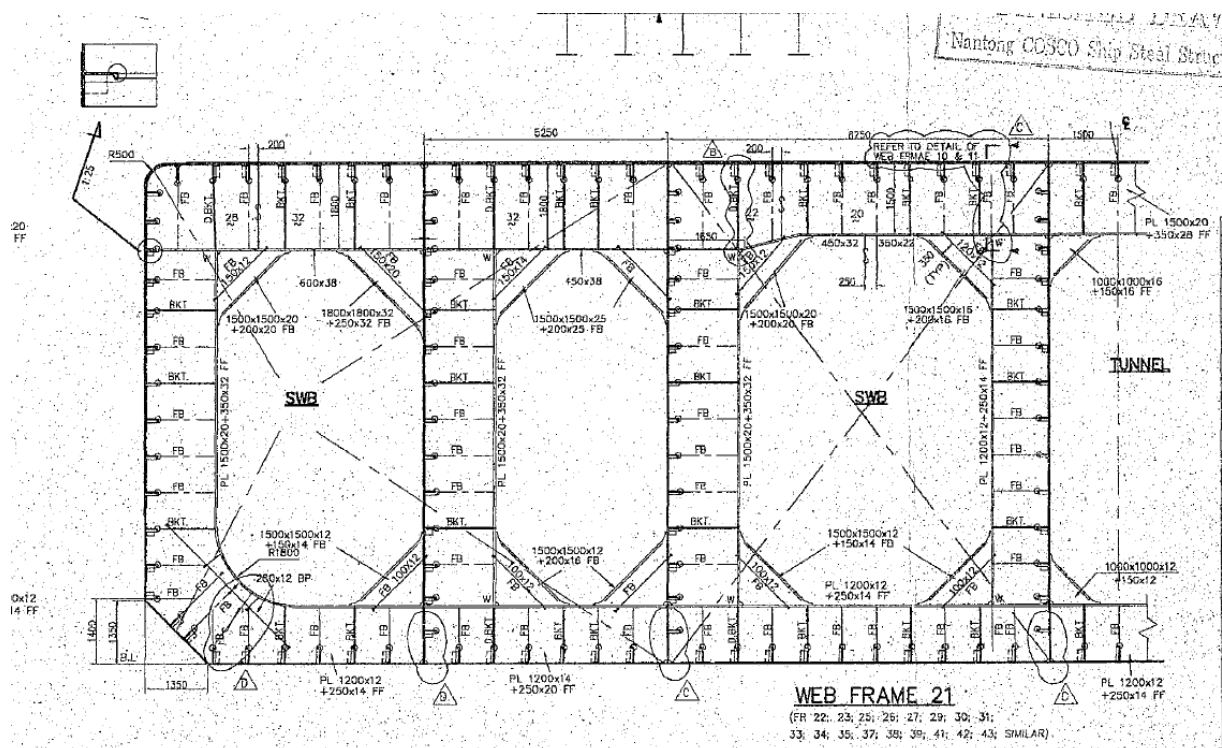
Figure III.C Drawing of a typical web frame 21. This drawing shows half a web frame because the frame is symmetrical from the center line.
